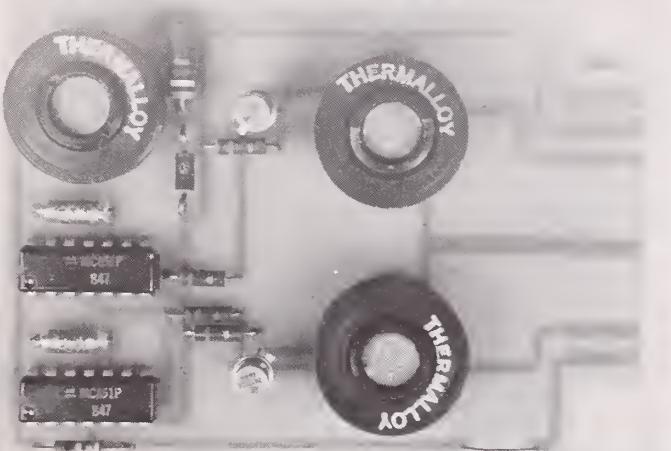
The printed circuit board layout used in the Rocky Mountain integrator:
